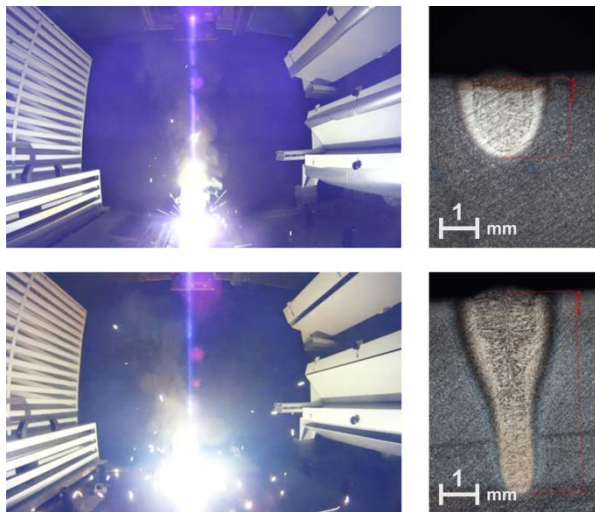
Weld fume distribution and corresponding weld seam geometries. Top: without any air flow. Bottom: with basic air flow. Welding parameters: laser power 3 kW, welding speed 2 m/min, focus diameter 300  $\mu\text{m}$ , mild steel.
